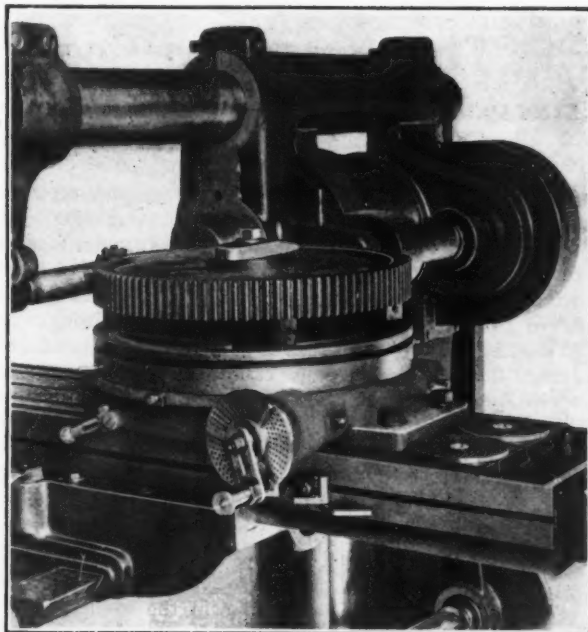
The Kempsmith Circular Milling Attachment Applied to the Cutting of Large Gears.
